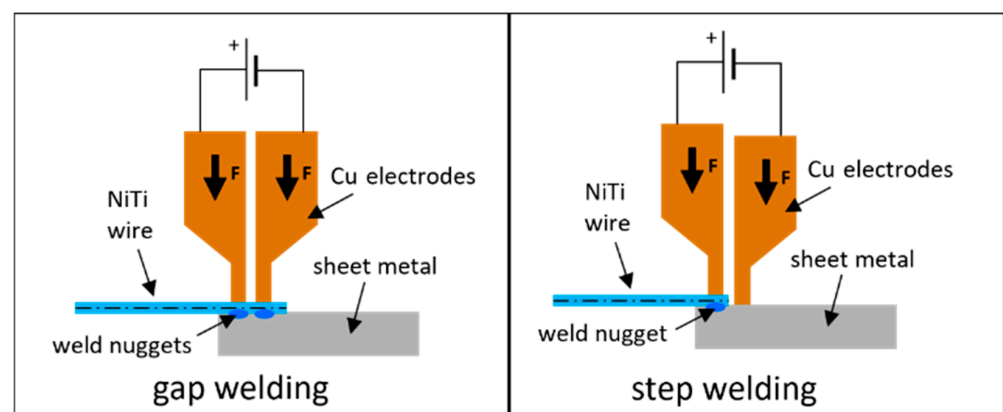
Schematic of resistance gap welding (left) and resistance step welding (right) of NiTi wires to a sheet of metal. Displayed are the two copper-based electrodes, pressing down on the work pieces.
